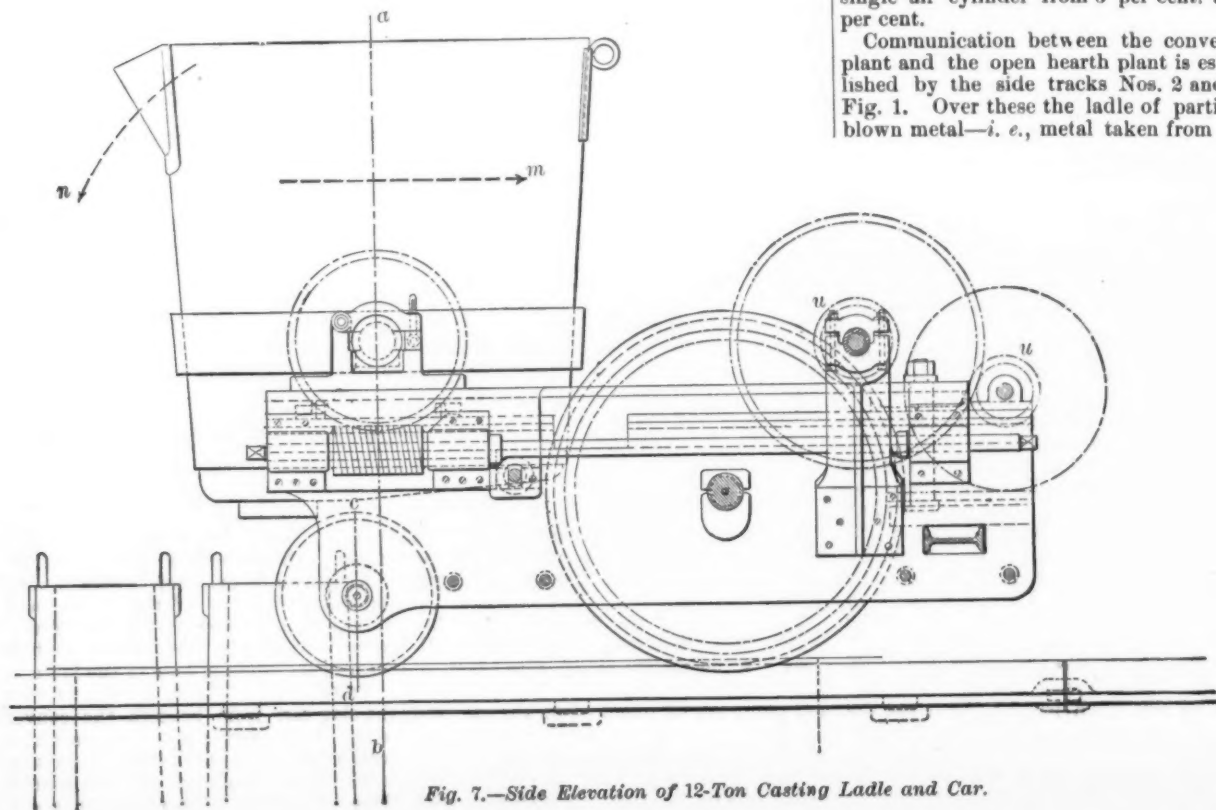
Side Elevation of 12-Ton Casting Ladle and Car.
